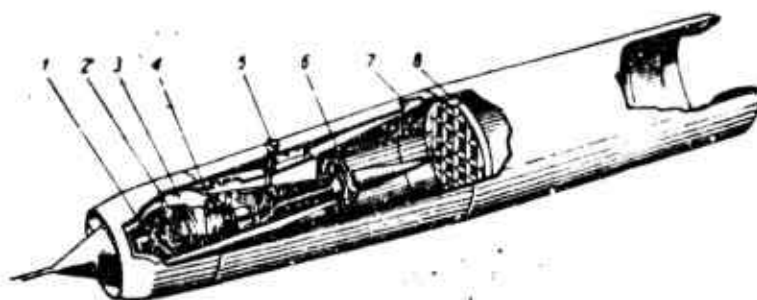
Supersonic ramjet engine: 1) fuel control system; 2) air turbine; 3) inlet of compressed air into the turbine; 4) fuel pump; 5) fuel feed; 6) fuel manifold and injector; 7) air exit from turbine; 8) flame stabilizer.
